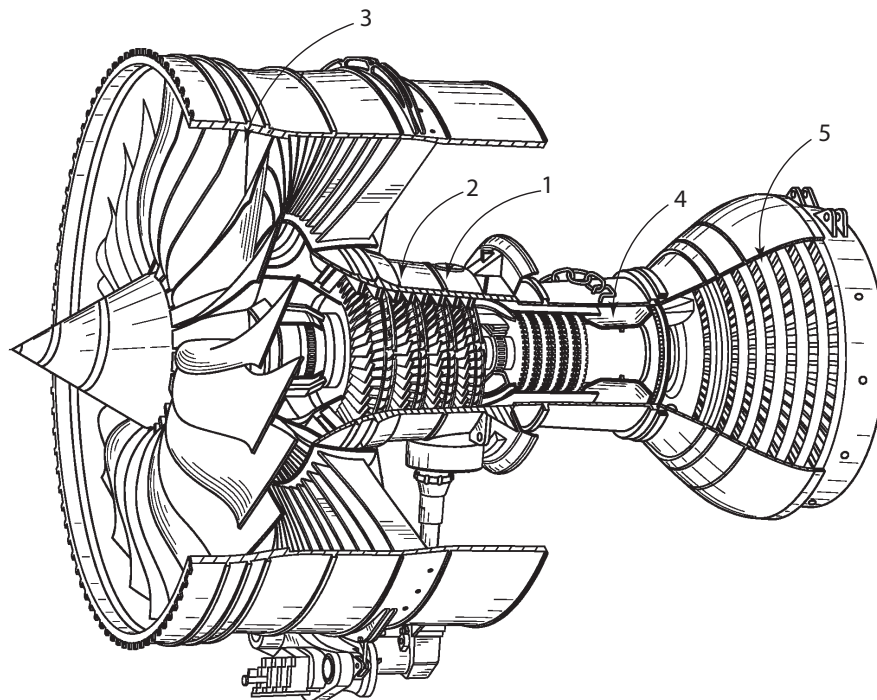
A cross section of a gas turbine engine. Labels: (1) Compressor section; (2) Static/Stator Vane assembly; (3) Fan assembly; (4) Combustion chamber; (5) Turbine section. Figure extracted and adapted from Becker *et al.* [6]
